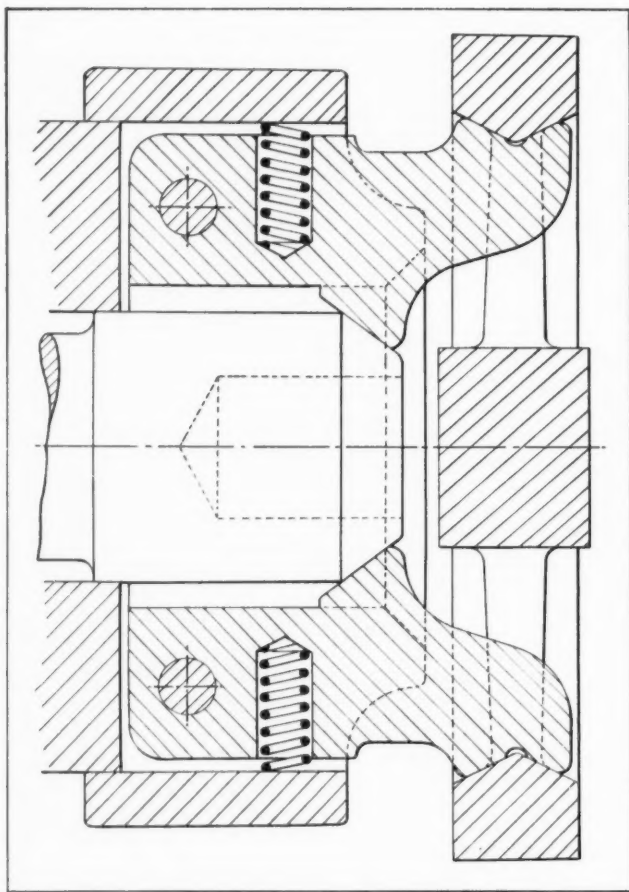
Push-out Chuck Arranged to Operate Pivoted Jaws
